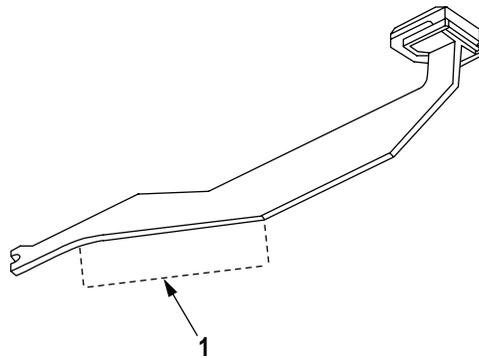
Primary Drive Lever and Vertical Cam Assembly Inspection.
